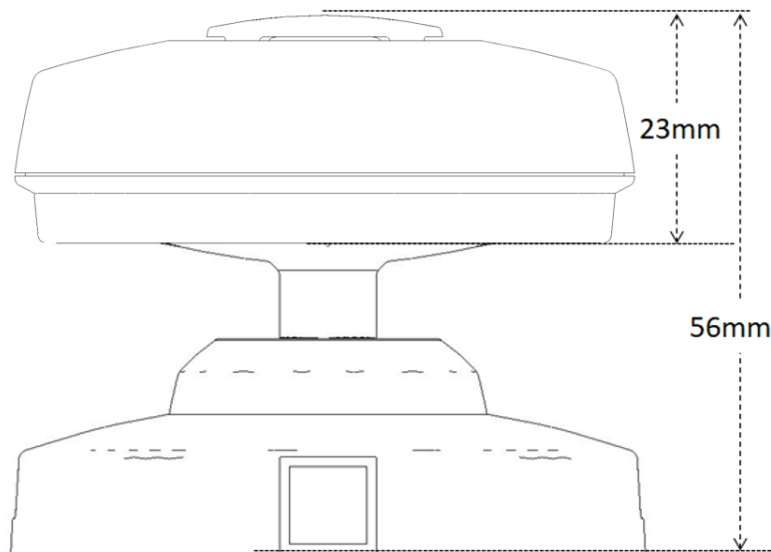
Modbus CO2 Multi-Sensor Dimension – Top View
